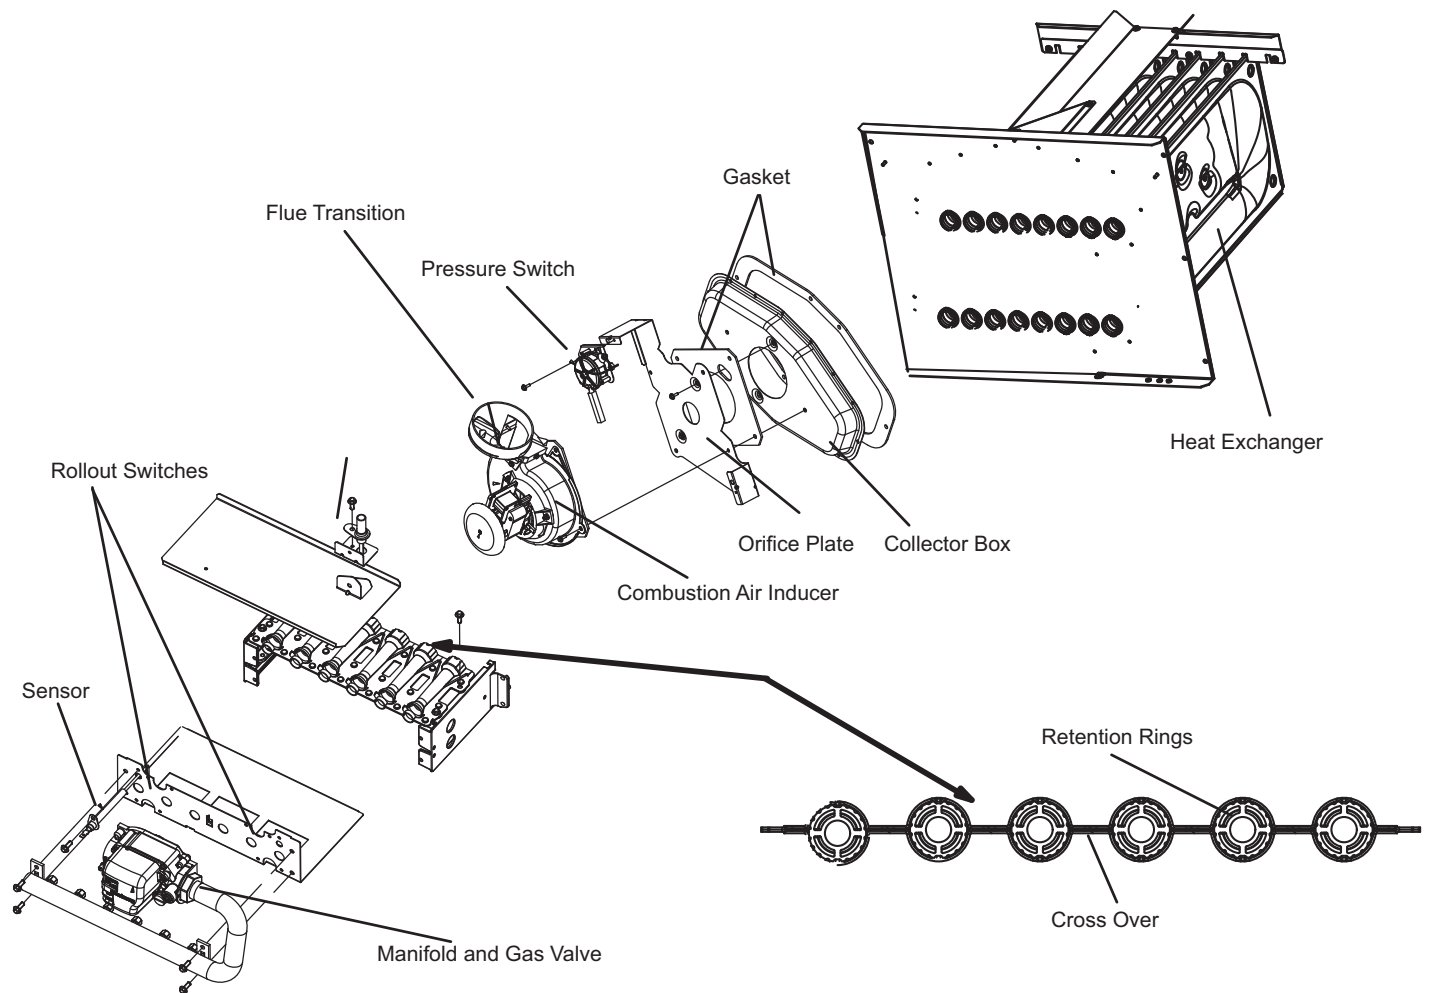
Burner, Combustion Air Inducer Assembly, and Heat Exchanger Removal
